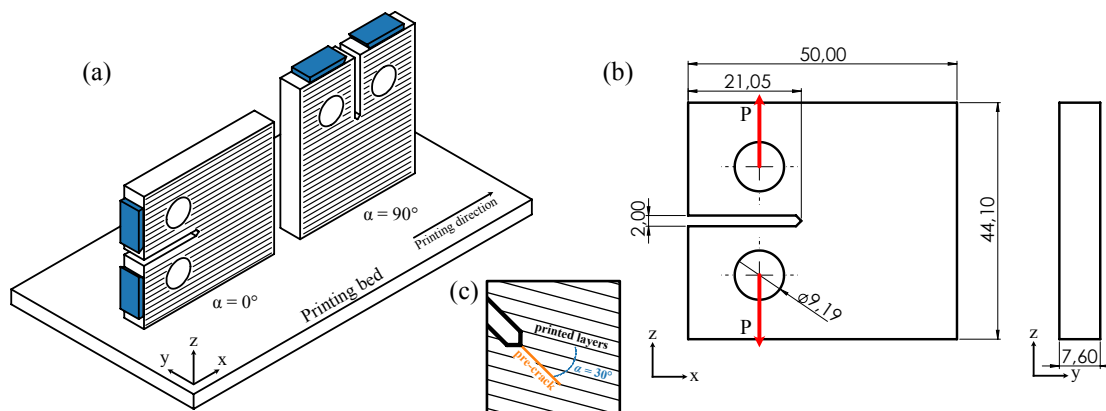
(a) Build orientations of the CT specimens investigated, 3D-printed knife edges glued post-printing to the notched face are indicated in blue; (b) CT specimen dimensions; (c) schematic description of the printing angle α .
